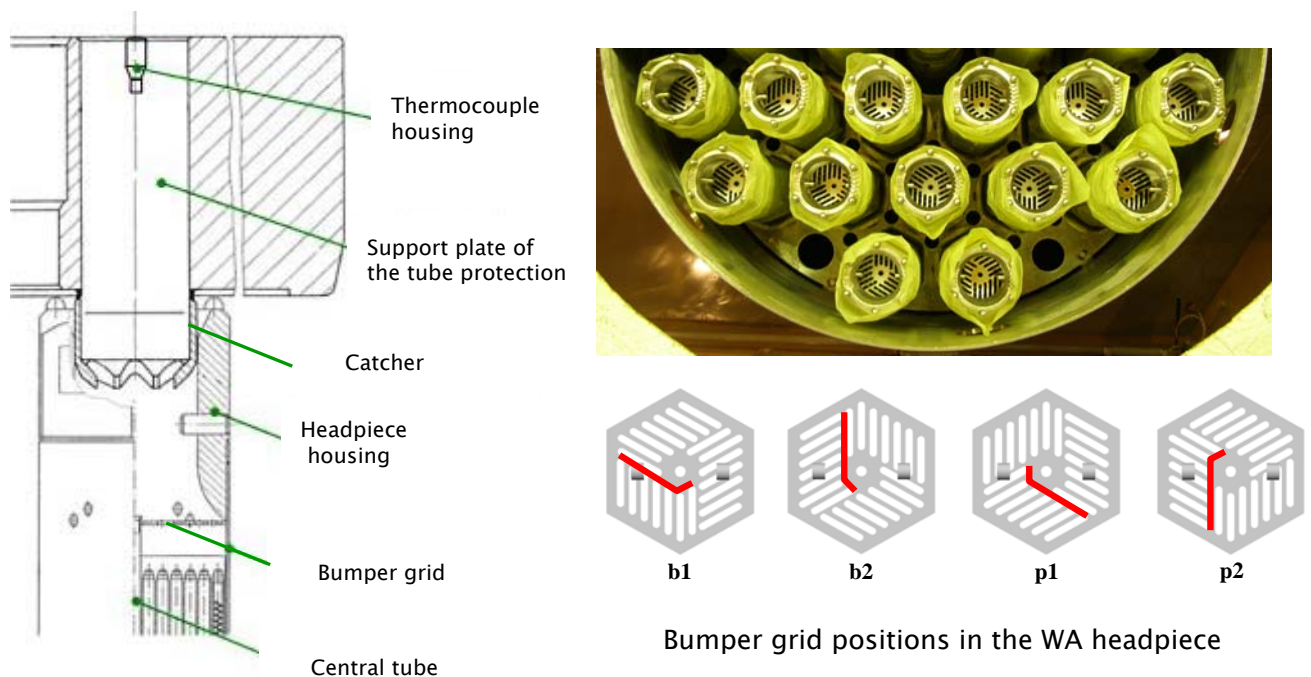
VVER-440 Headpiece, Bumper grid and WA in a container of the fresh fuel unit at NPP
